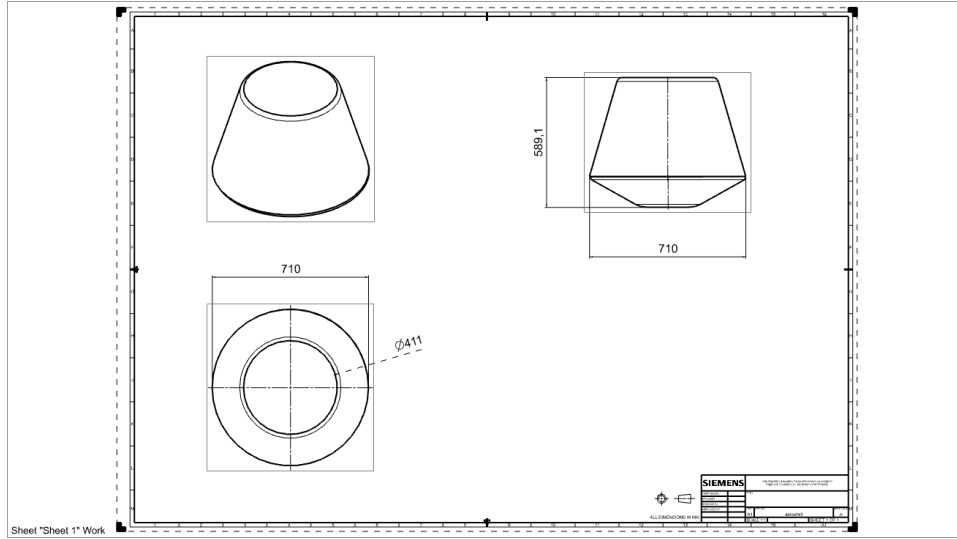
Dimensioned aeroshell assembly CAD (dimensions in millimeters).
